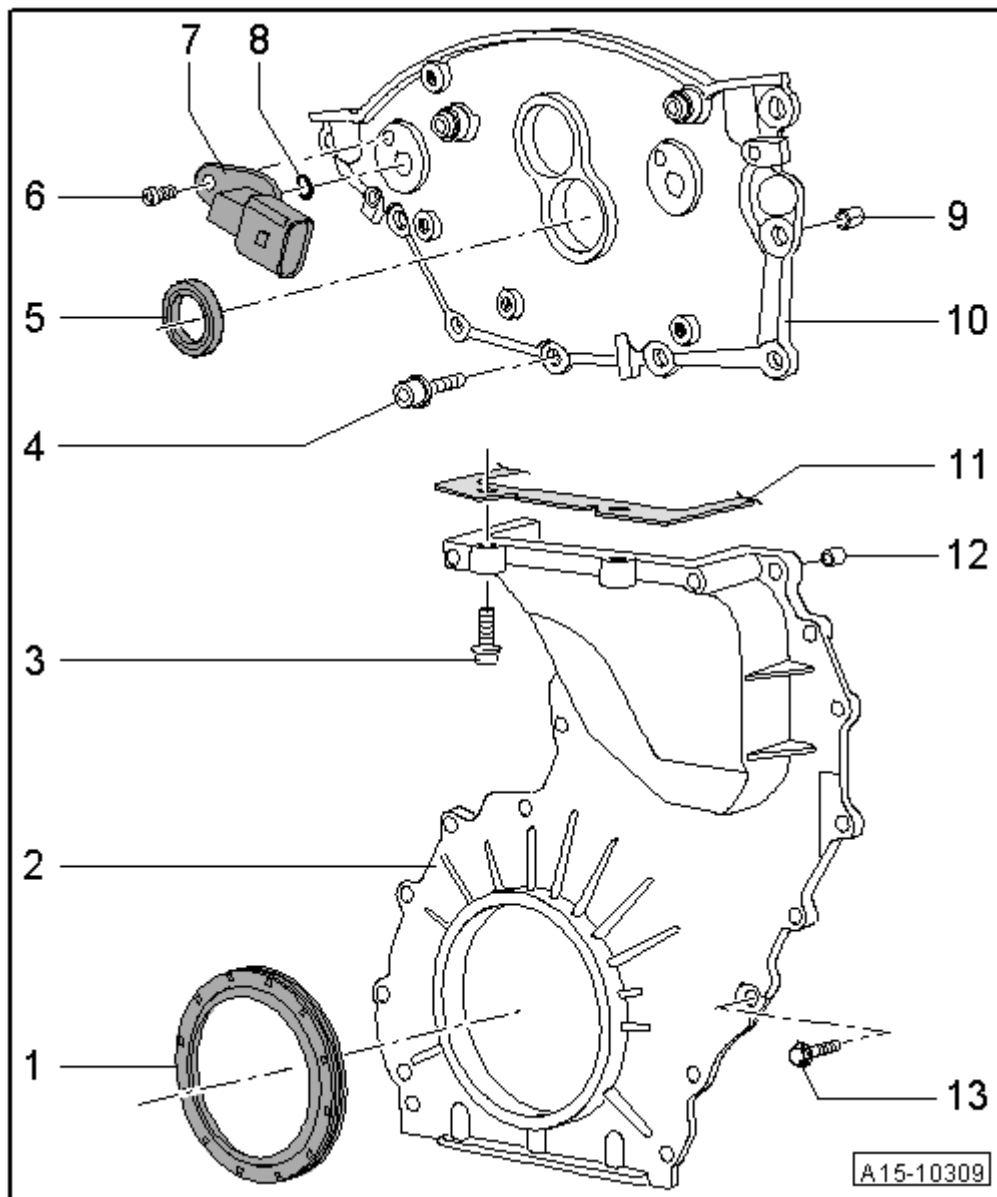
Identifying Timing Chain Cover And Sealing Flange
